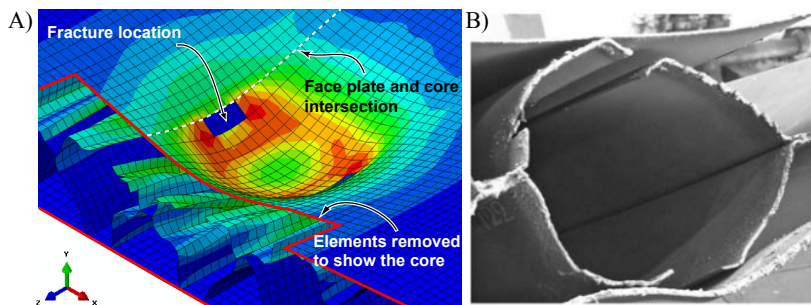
A) Deformation mechanism in optimized X-core sandwich panel. B) Picture of the failed laser weld in the X-core sandwich panel. Figure from Ehlers et al. (2012).
